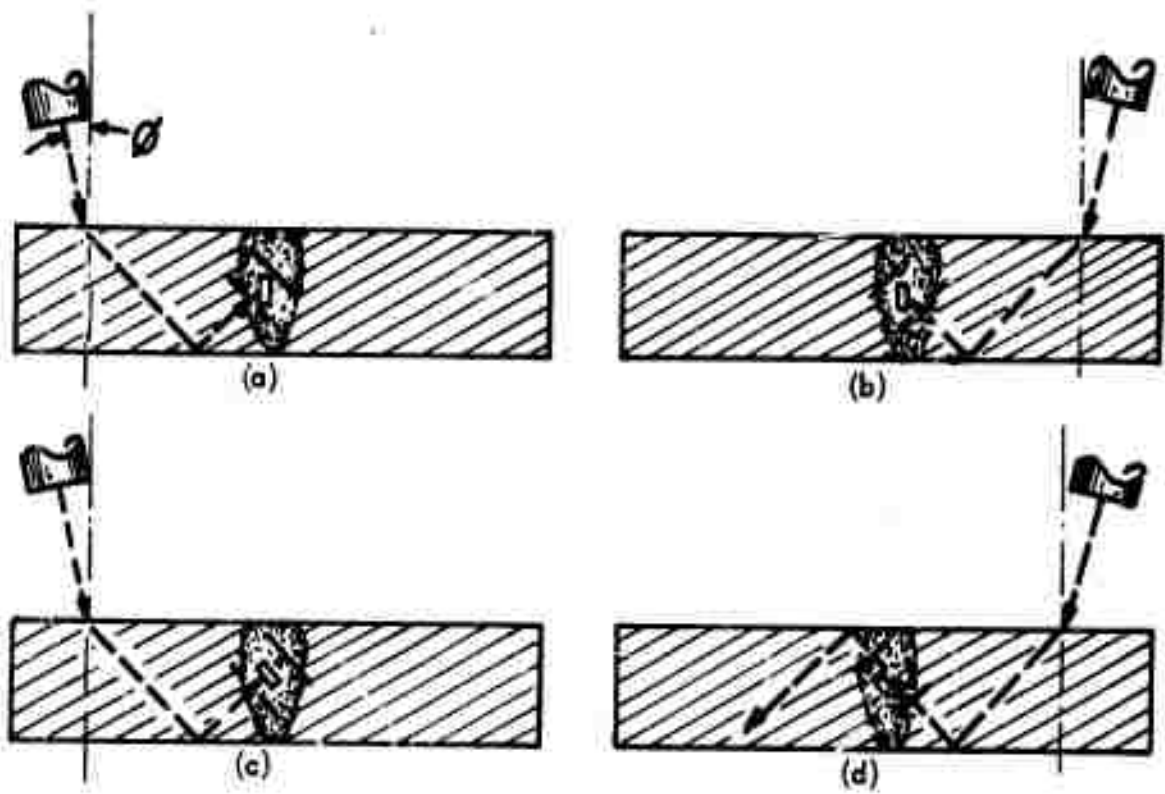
INSPECTION OF WELD FROM BOTH SIDES
